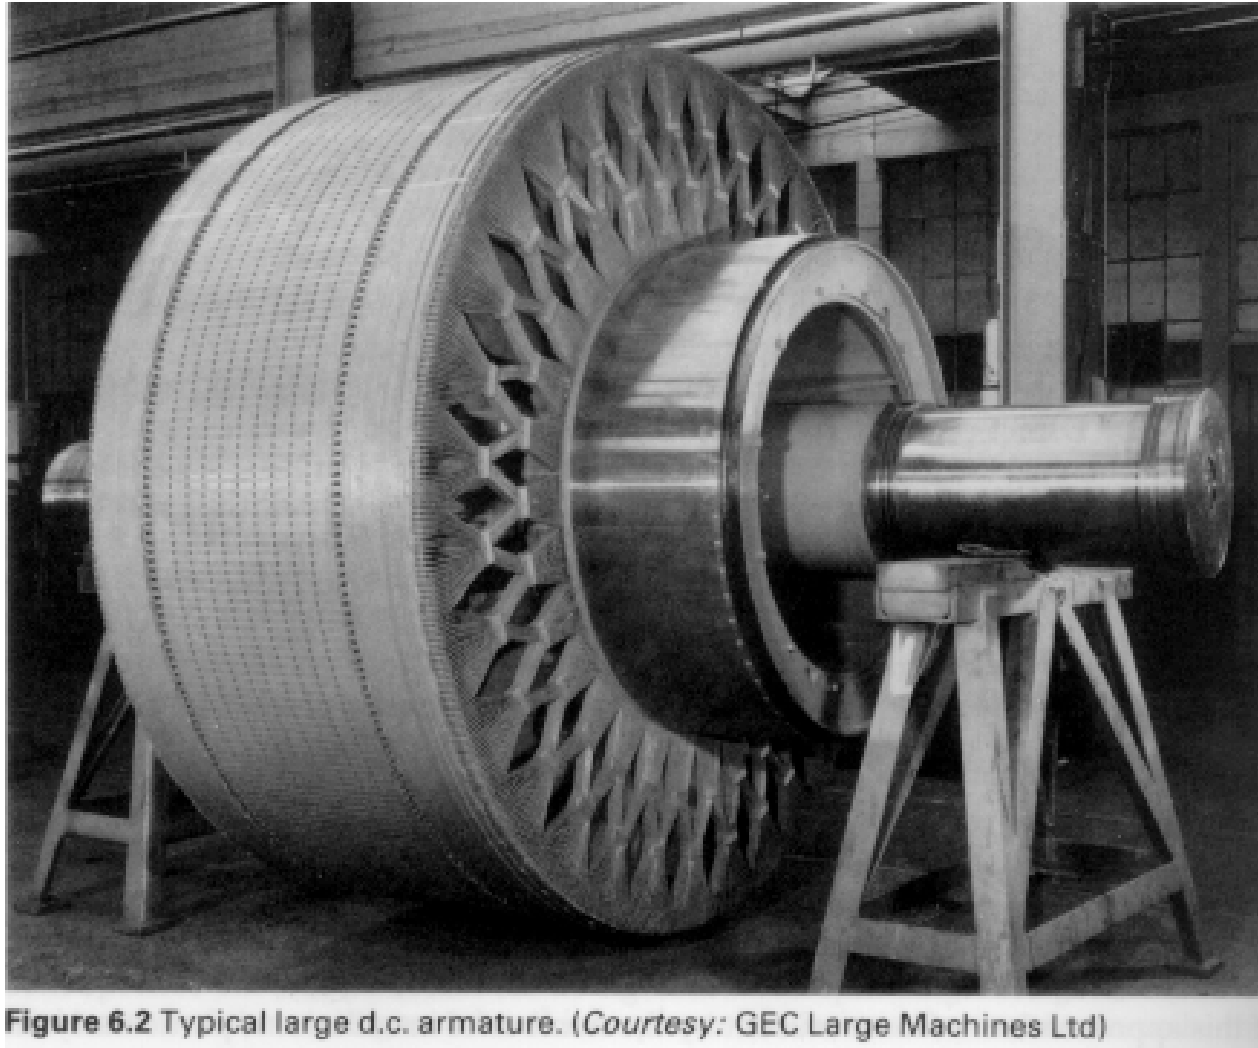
Typical large d.c. armature. (Courtesy: GEC Large Machines Ltd)
